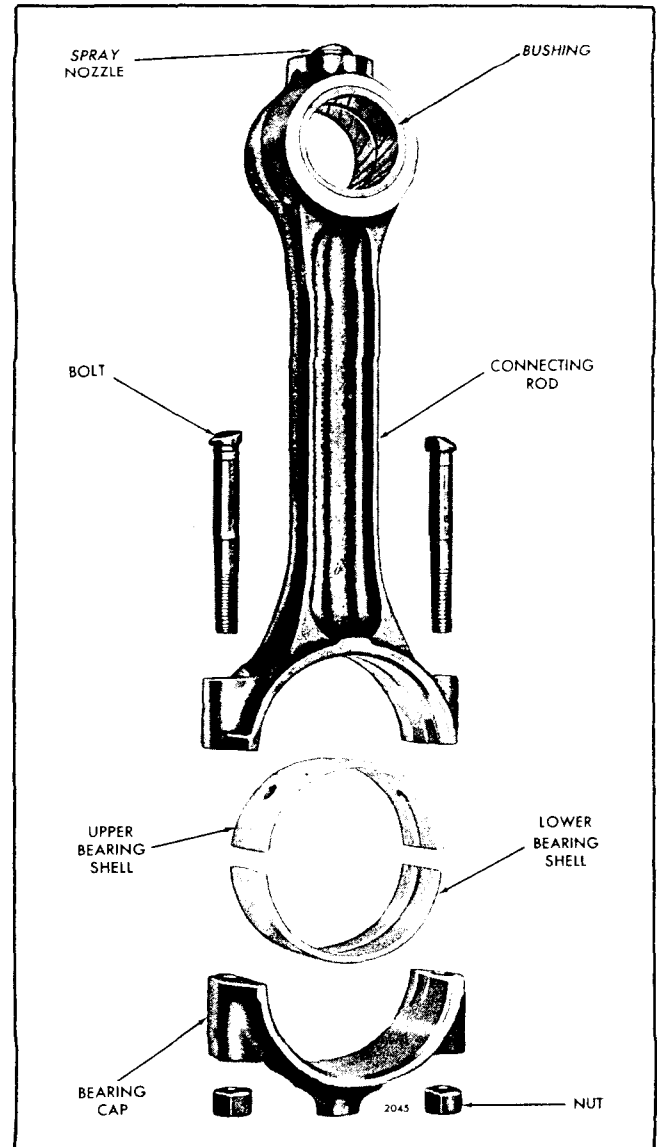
Typical Connecting Rod Details and Relative Location of Parts
